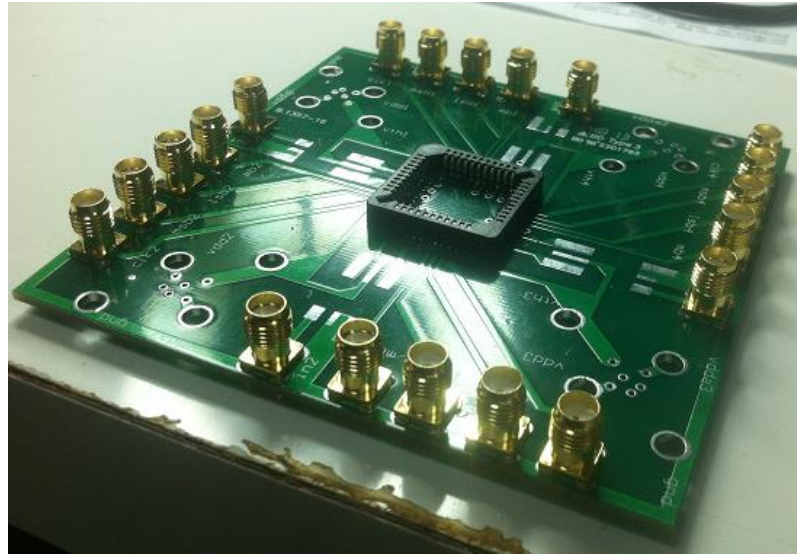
Test PCB with some components for the 3rd order SD ADC.
